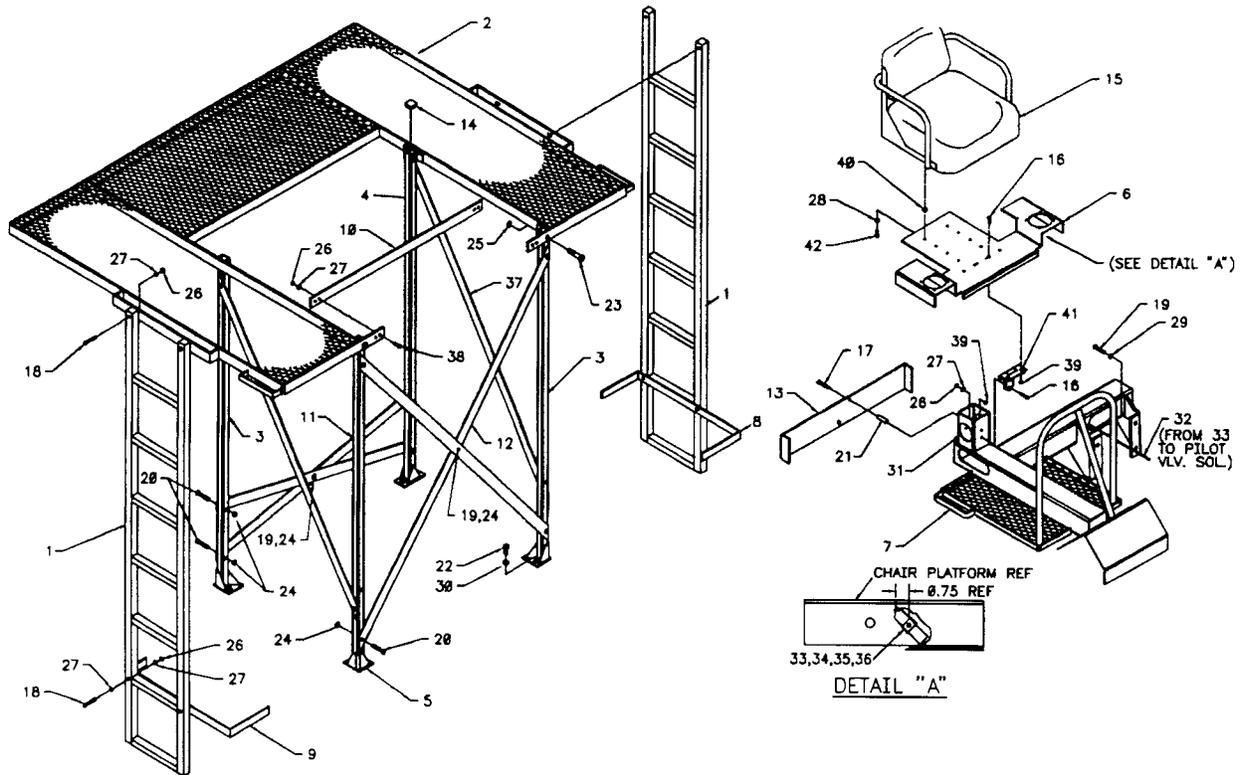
A. OPTION - BASE AND OUTRIGGER ASSEMBLY-HIGH FRAME (41706839)
